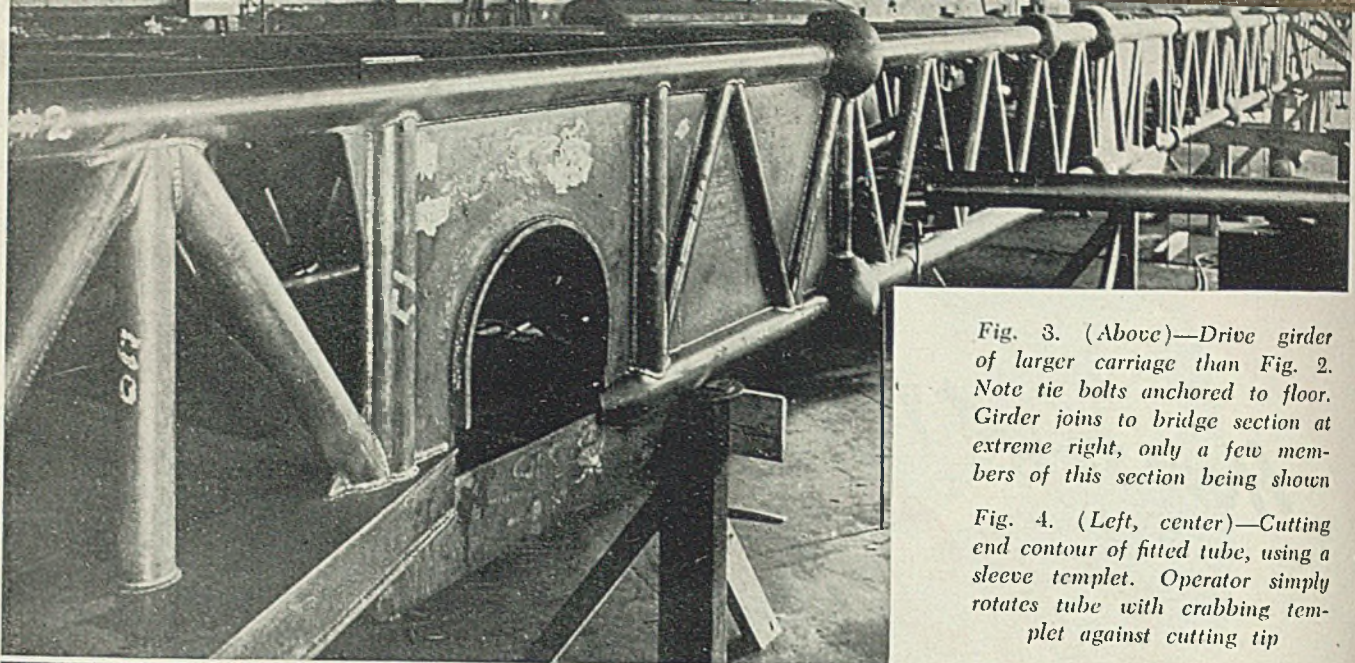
(Above)—Drive girder of larger carriage than Fig. 2. Note tie bolts anchored to floor. Girder joins to bridge section at extreme right, only a few members of this section being shown
